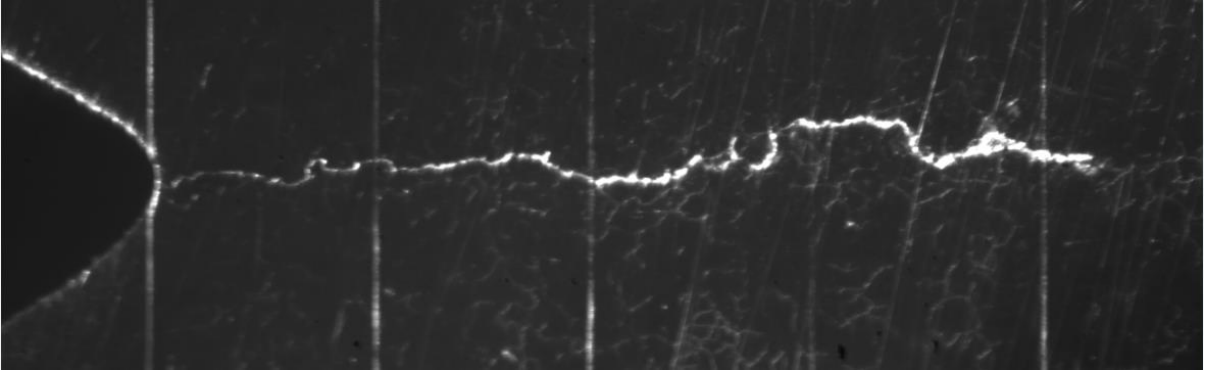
XY6 fatigue crack (to failure)
